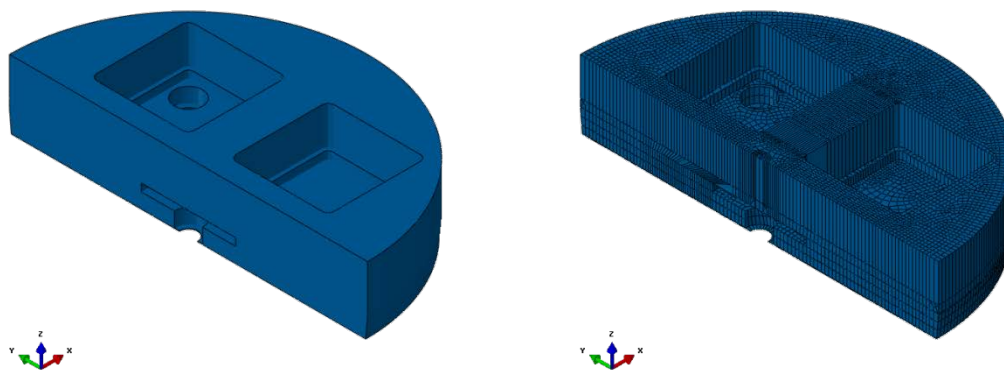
Insert PWR geometry (left), and mesh (right) – base plate.
